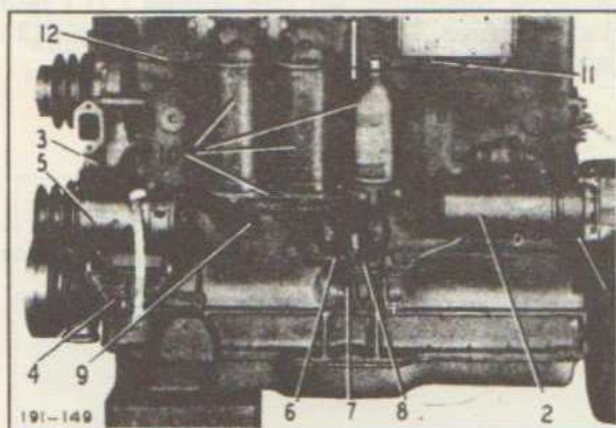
View Showing Units and Parts To Be Removed from Left Side of Engine
